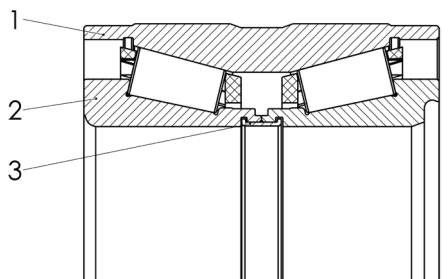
Generation I wheel hub unit with a double-row tapered roller bearing; 1 outer ring, 2 inner ring and 3 clamping ring
